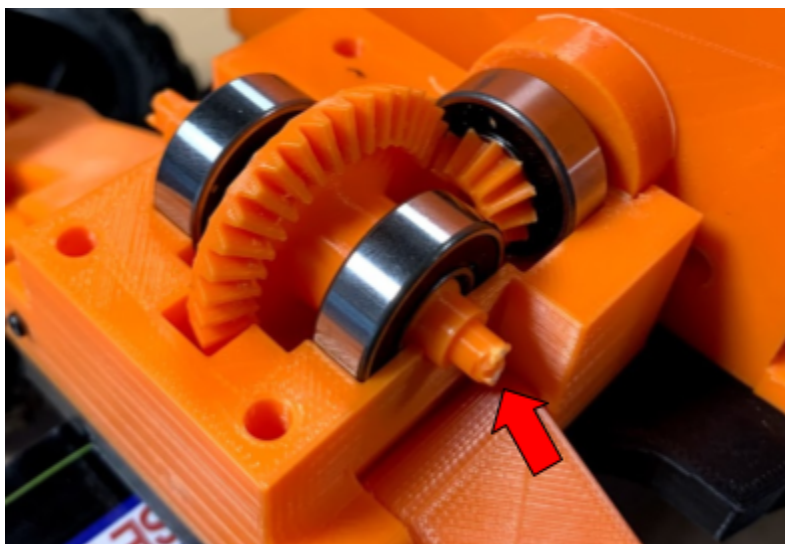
Example of 3D Printed Shaft Failure
